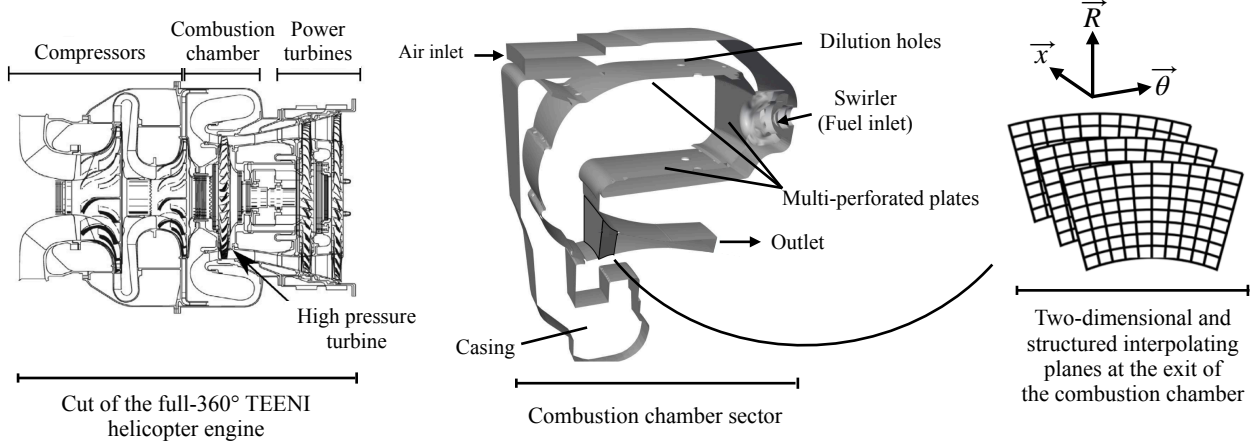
Cut of the full-360° TEENI helicopter engine (left), combustion chamber sector (middle) and CHORUS interpolating mesh (right) [2].
